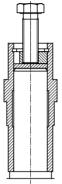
Gear unit mounted to shaft with a shoulder using the fastening element
